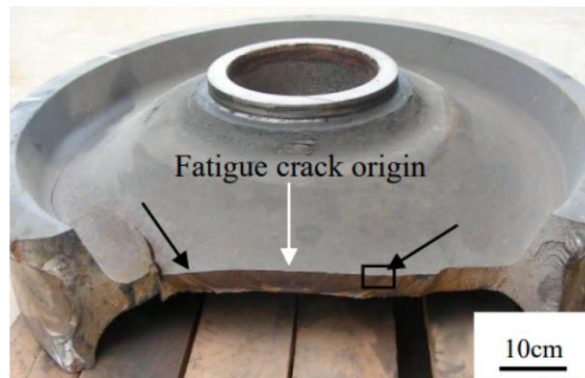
Example of the wheel web fatigue crack initiation and wheel fracture [8, 9]
